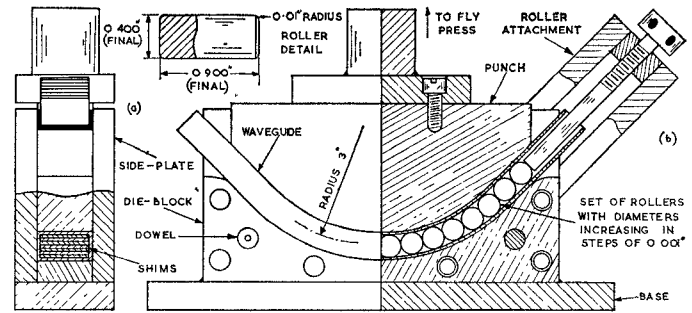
Press tool for bending waveguides; (a) waveguide tube, with shims in position, during bending, (b) insertion of rollers for final sizing.
